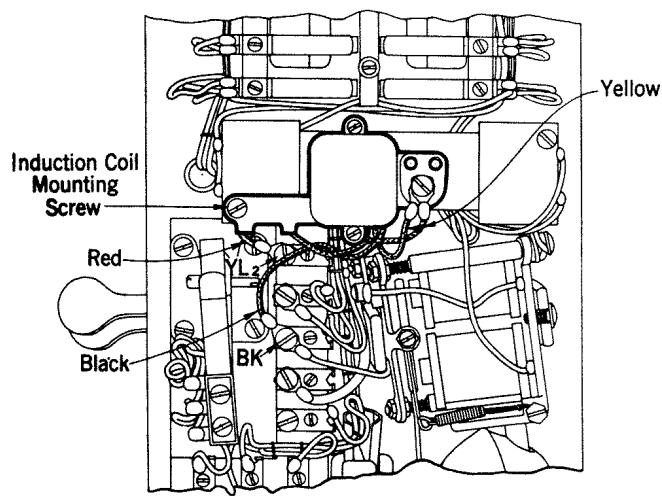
61C Filter Shown in B-Type Hand Set Mounting
